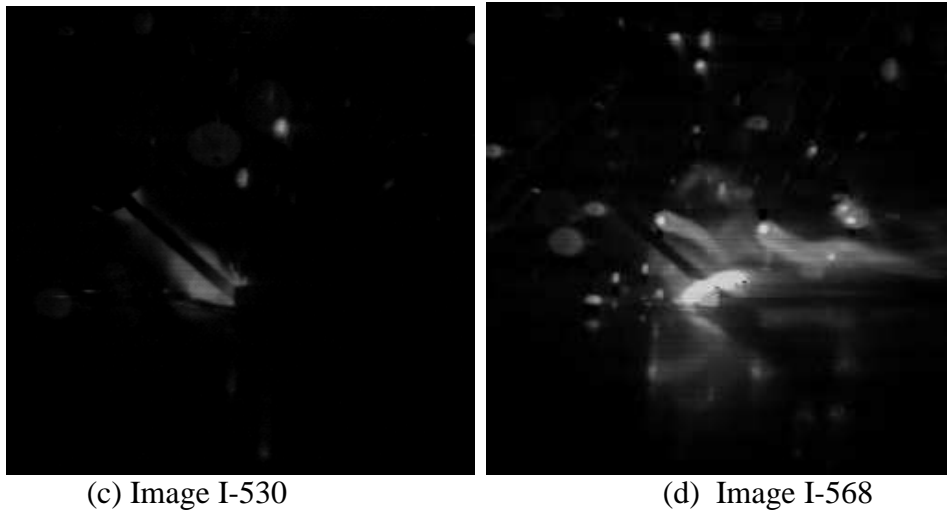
(cont.) HSV Showing Short Circuiting of the Wire to the Weld Pool and Arc Re-Ignition in Lap Fillet Specimen 083005-1
